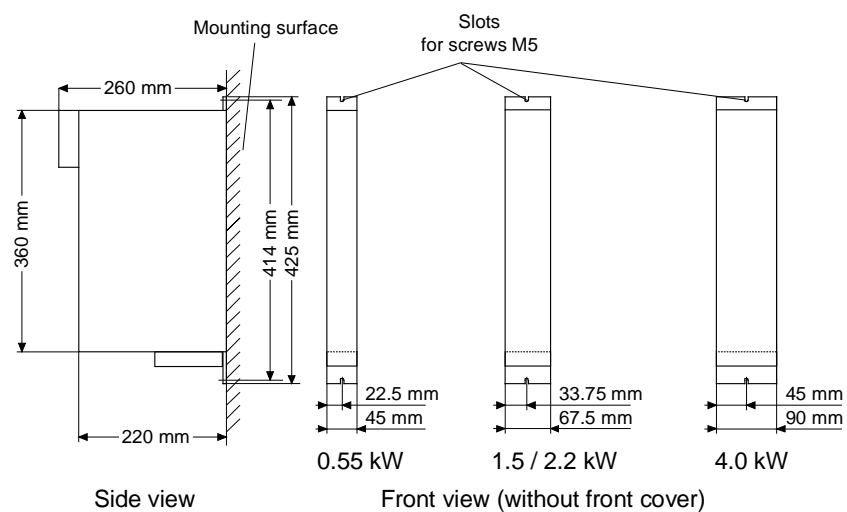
Dimension drawings for housings up to 90 mm wide
